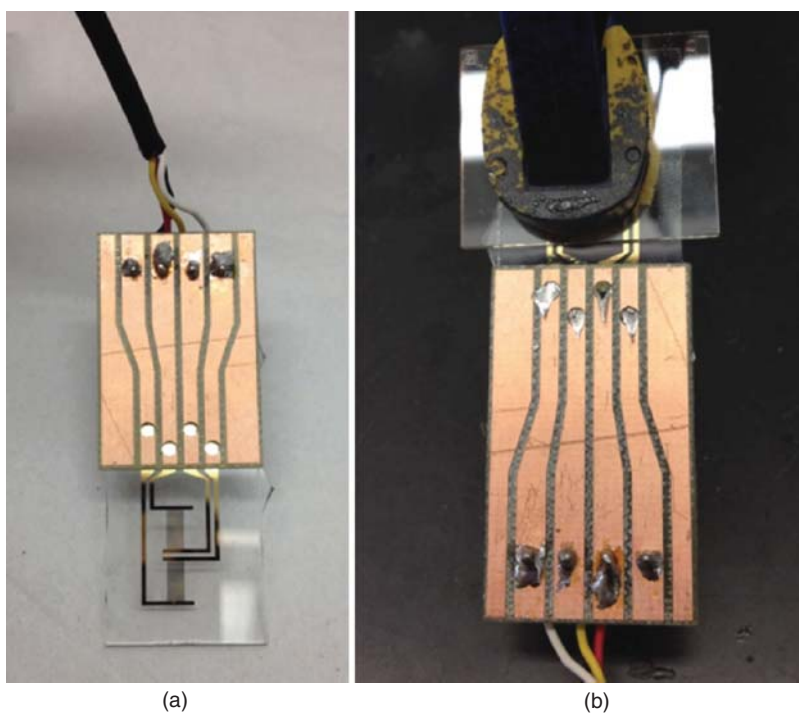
(a) IDA chip glued to circuit board before being soldered together. (b) After being soldered together. (*See insert for color representation of this figure.*)
